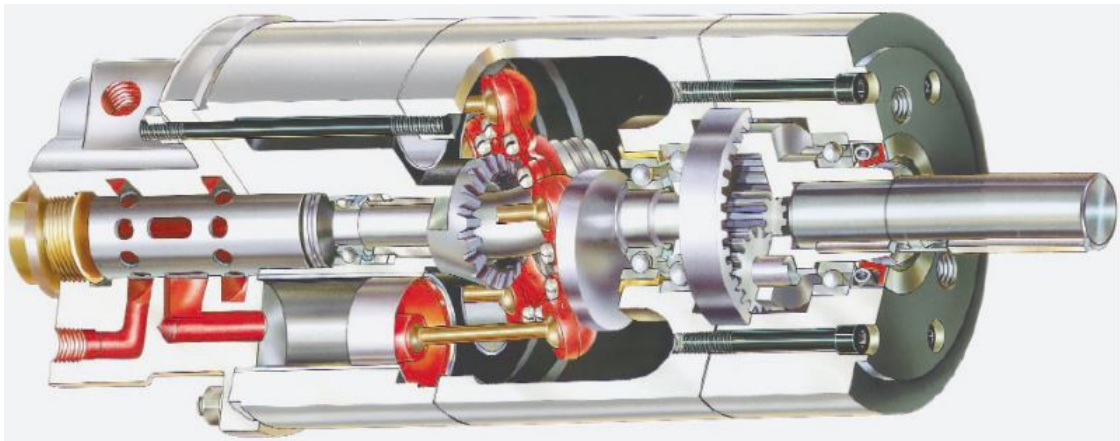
Cutaway view of an axial piston air motor (*Air Motor Selection and Sizing* 2012)
